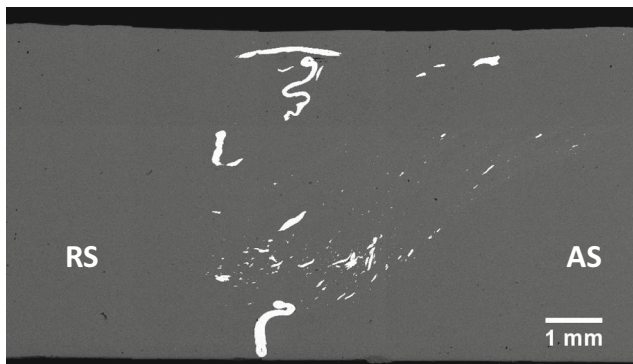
Backscattered SEM macrograph of weld nugget with Cu insert. Cu was distributed in the weld nugget
